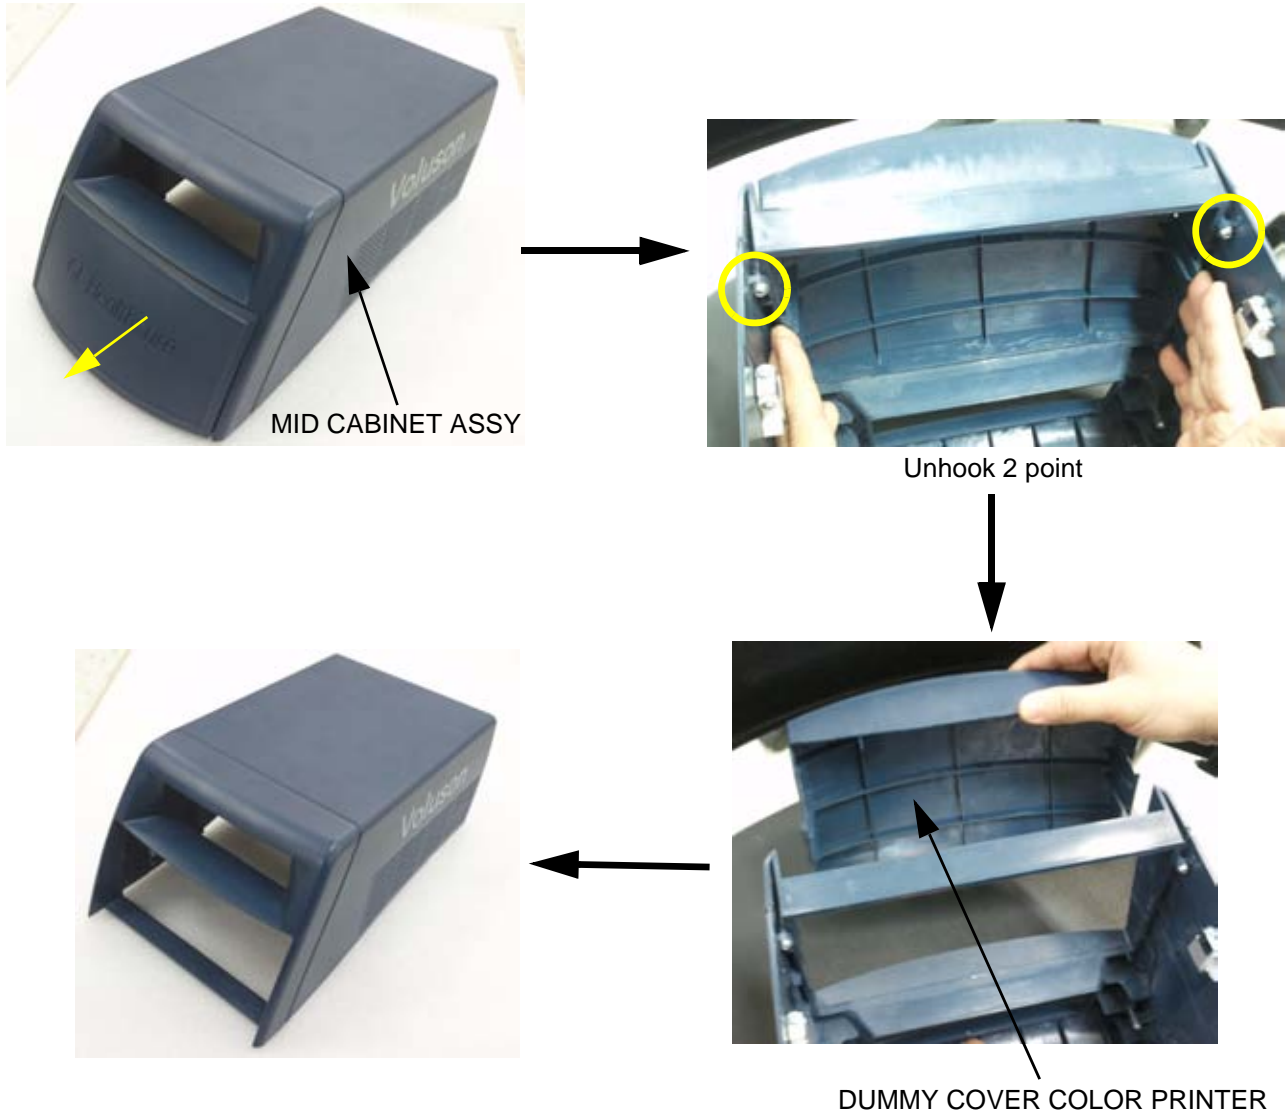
Remove DUMMY COLOR PRINTER From MID CABINET ASSY
